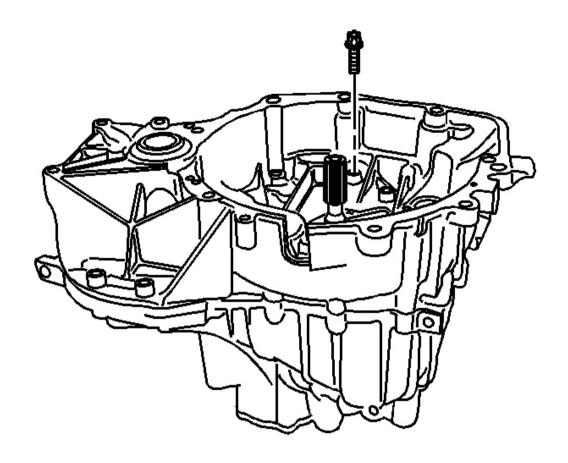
View Of Clutch Housing Side Transmission Housing Bolt Courtesy of GENERAL MOTORS CORP.
